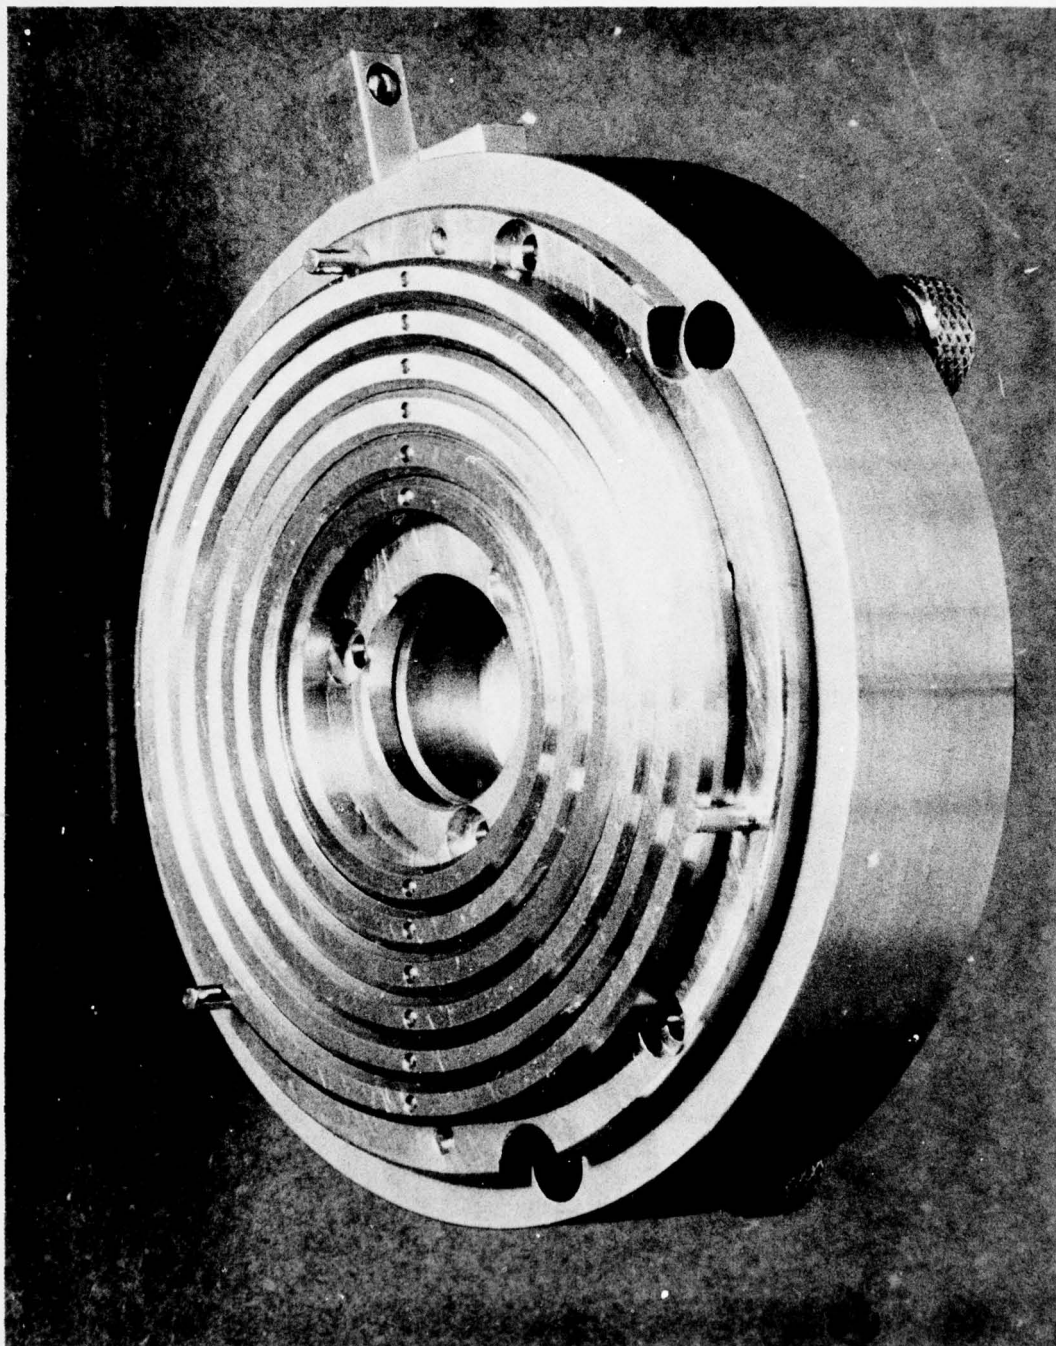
VIEW OF RINGS MOUNTED ON CAGE AND SUPPORT PLATE OF FLEXIBLE THRUST BEARING LLF-1T
